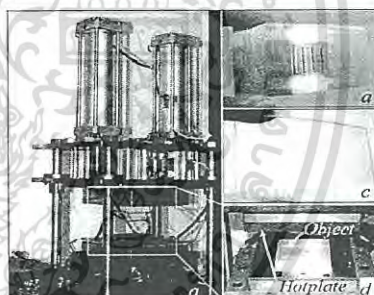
(a) In-house system for PMMA microfluidic chip, (b) Aluminum micromold, (c) photograph of typical hot embossed PMMA sheet, and (d) closed-up on hot embossing chamber.
